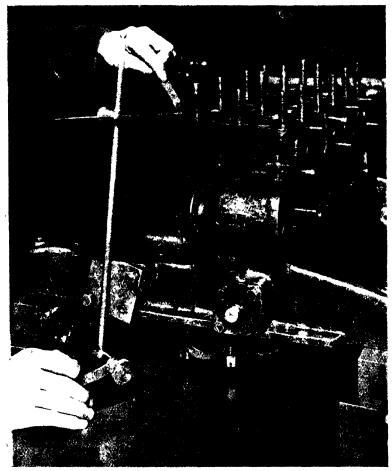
SETTING UP JOB HORIZONTALLY ON A TABLE
